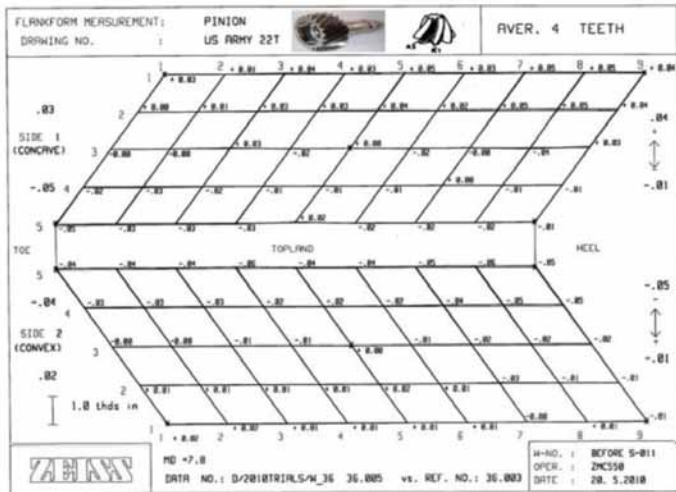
TTO Bevel Pinion A518-00011 flank form analysis after initial MMP treatment.
